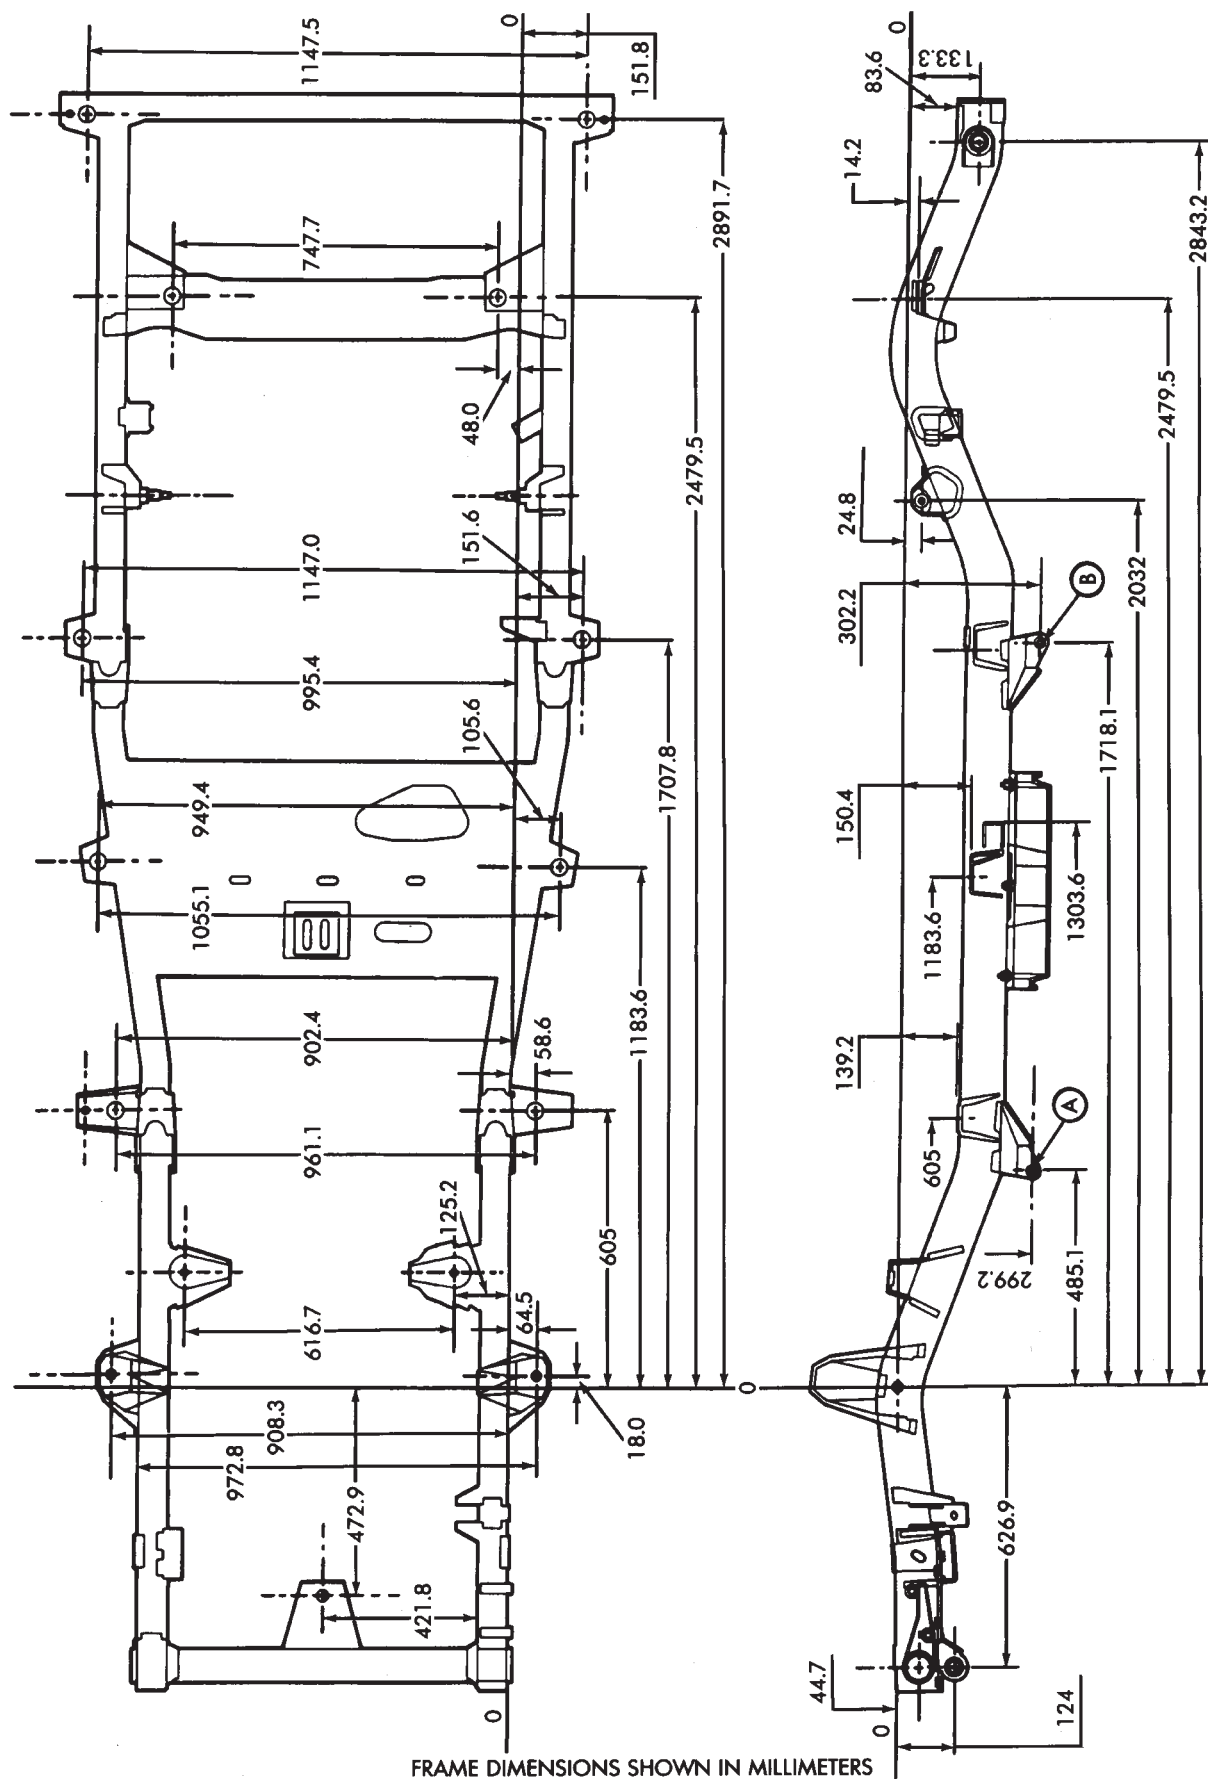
Frame Alignment Dimensions—YJ Vehicles
